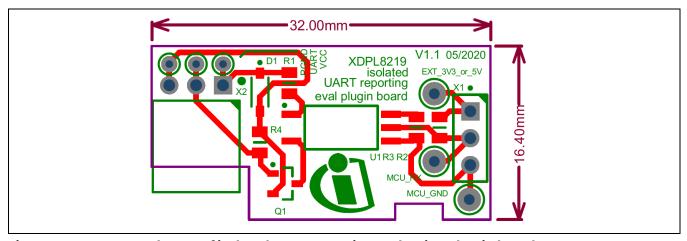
PCB top layout of isolated UART reporting evaluation plug-in board
